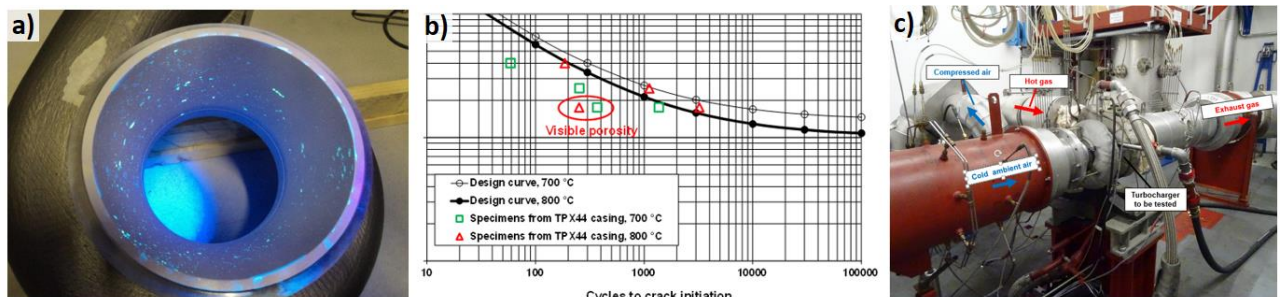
a) Prototype of the turbocharger made of the newly applied austenitic cast steel b) TMF data generated from samples cut out of prototype castings, c) test rig with assembled turbocharger;
